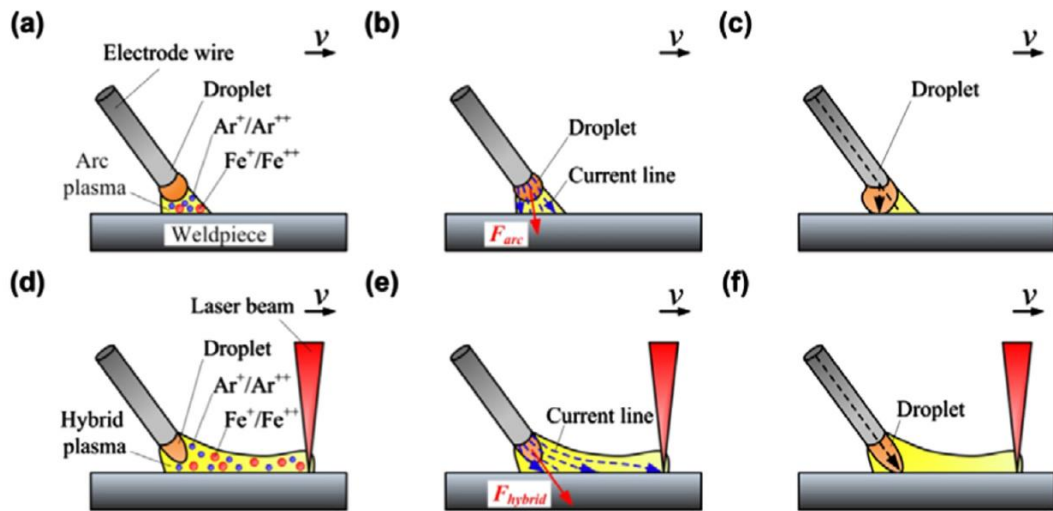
Comparison of droplet transfer in short-circuit mode in (a) to (c) - arc welding, (d) to (f) - hybrid laser arc welding [39]
